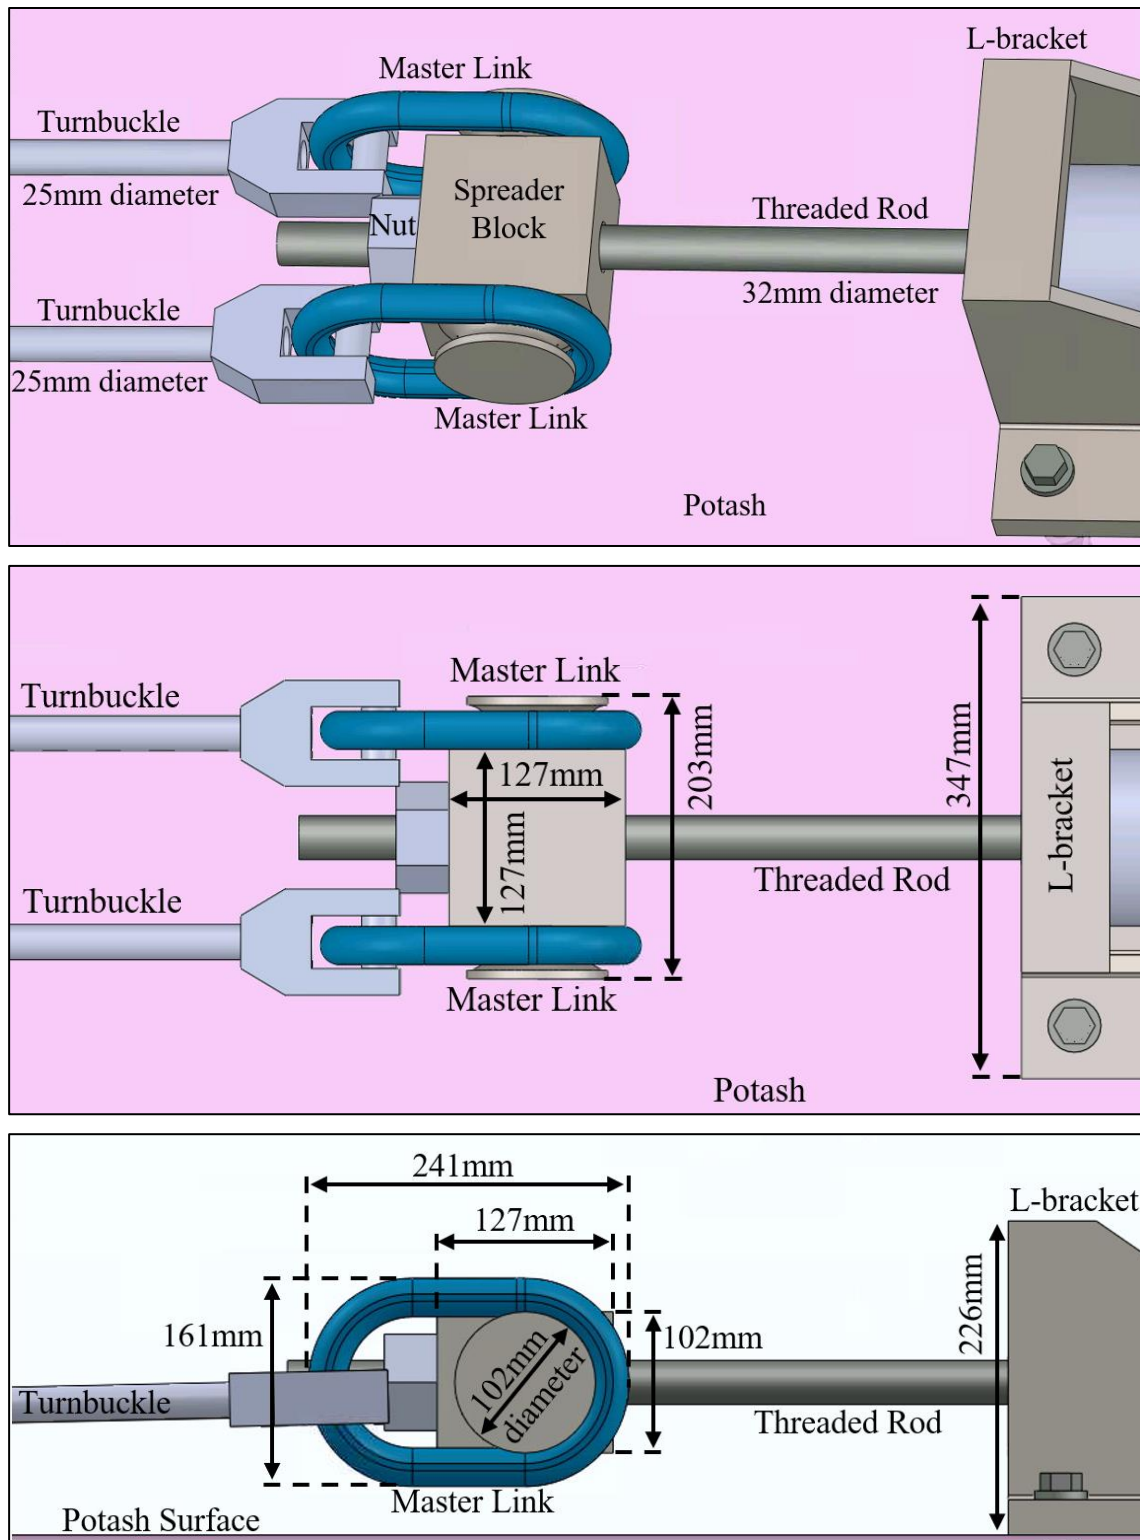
Diagrams showing the spreader block for transferring force from threaded rod to turnbuckles. Shown from isometric view (top), plan view (middle), and side view (bottom)
